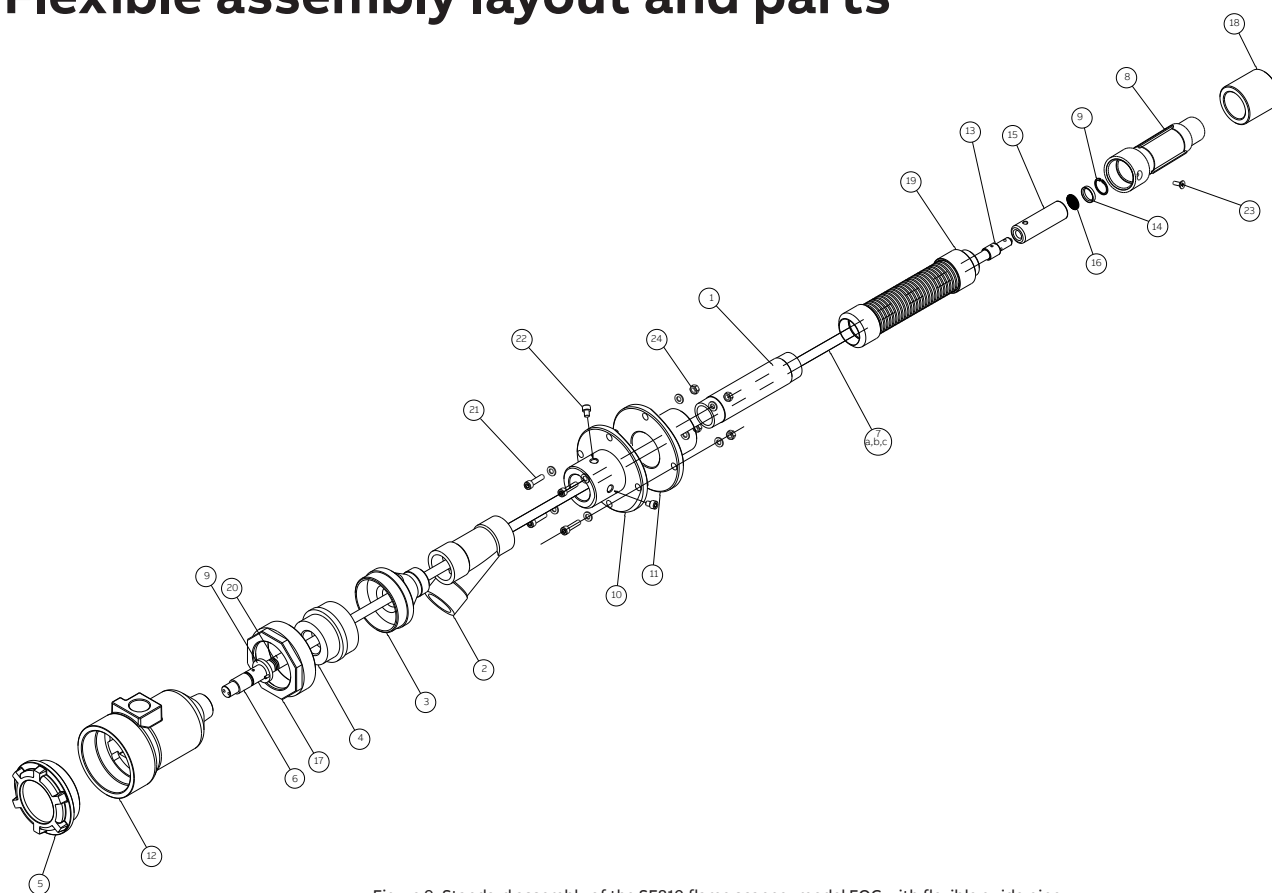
Standard assembly of the SF810 flame scanner model FOC with flexible guide pipe.
